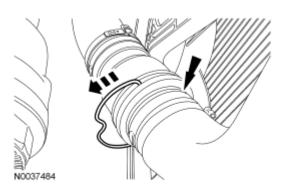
Removing Retaining Clip And Locating Lower Radiator Hose Courtesy of FORD MOTOR CO.
